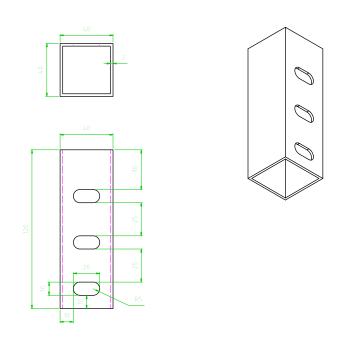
Sliding valve 3 inlet and outlet chamber.
